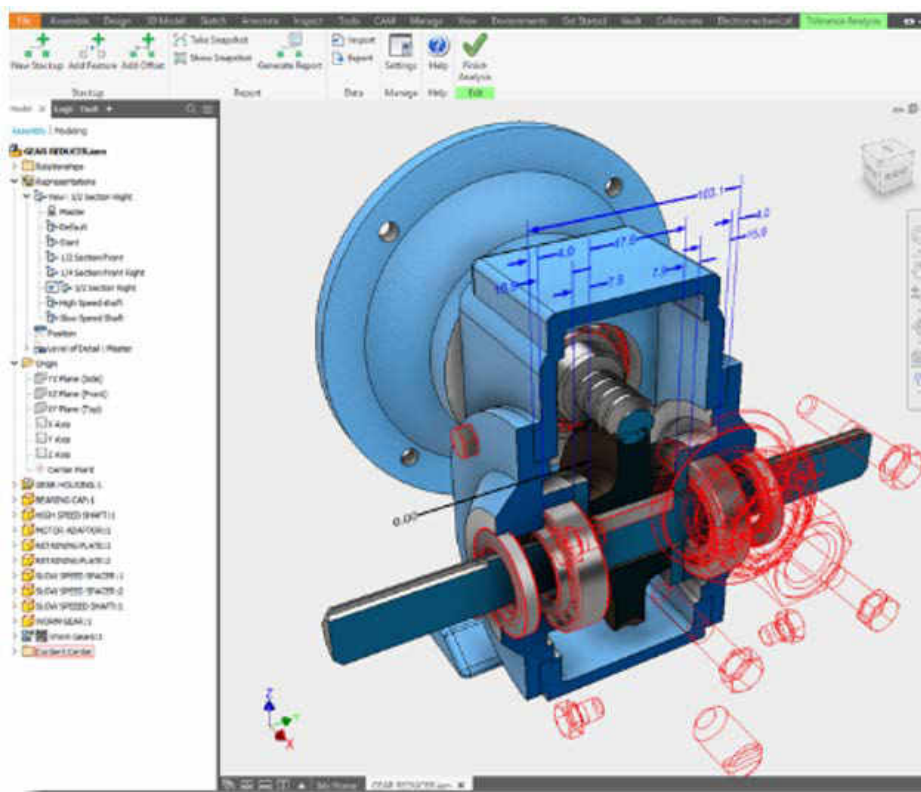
"Tolerance Analysis" module in Inventor [6].
